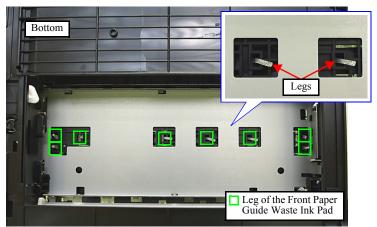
Installing the Front Paper Guide Waste Ink Pad
